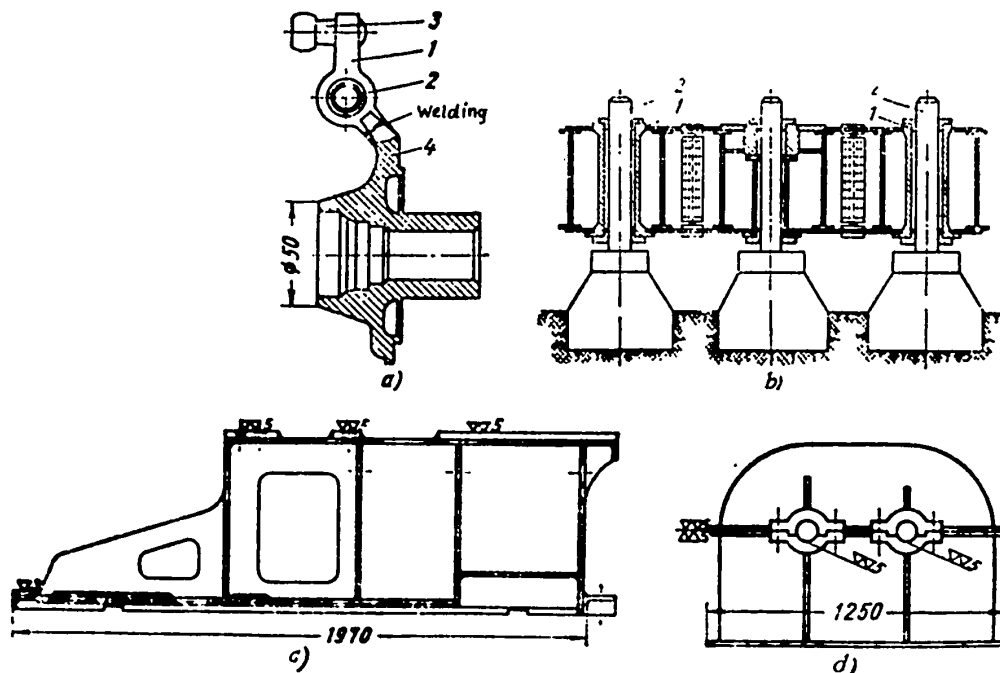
Examples of Applying Various Basic Technological Methods in the Making of Welded Parts
